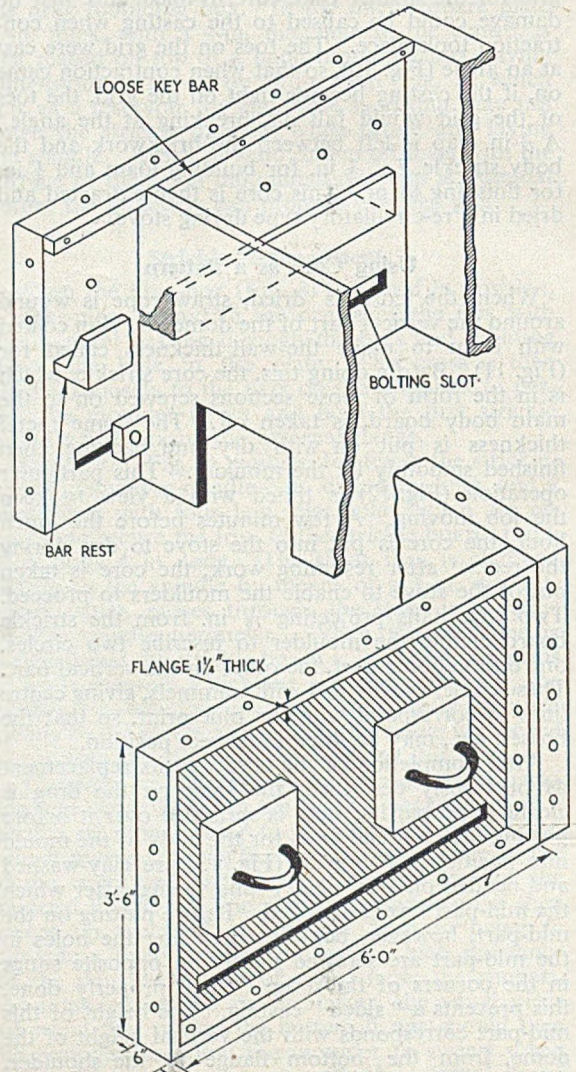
Constructional Details of an Adjustable Moulding Box.
